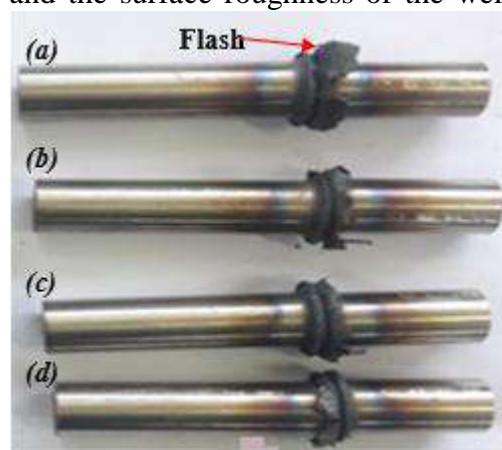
Friction Welded Specimens at Forging Pressure is (a) 192.4 MPa, (b) 240.5 MPa, (c) 288.6 and (d) 384.8 MPa.
